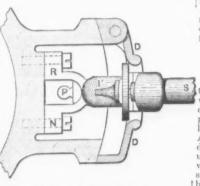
Enlarged Sectional View of Cylinder, Piston, Air and Distributing Valves.
